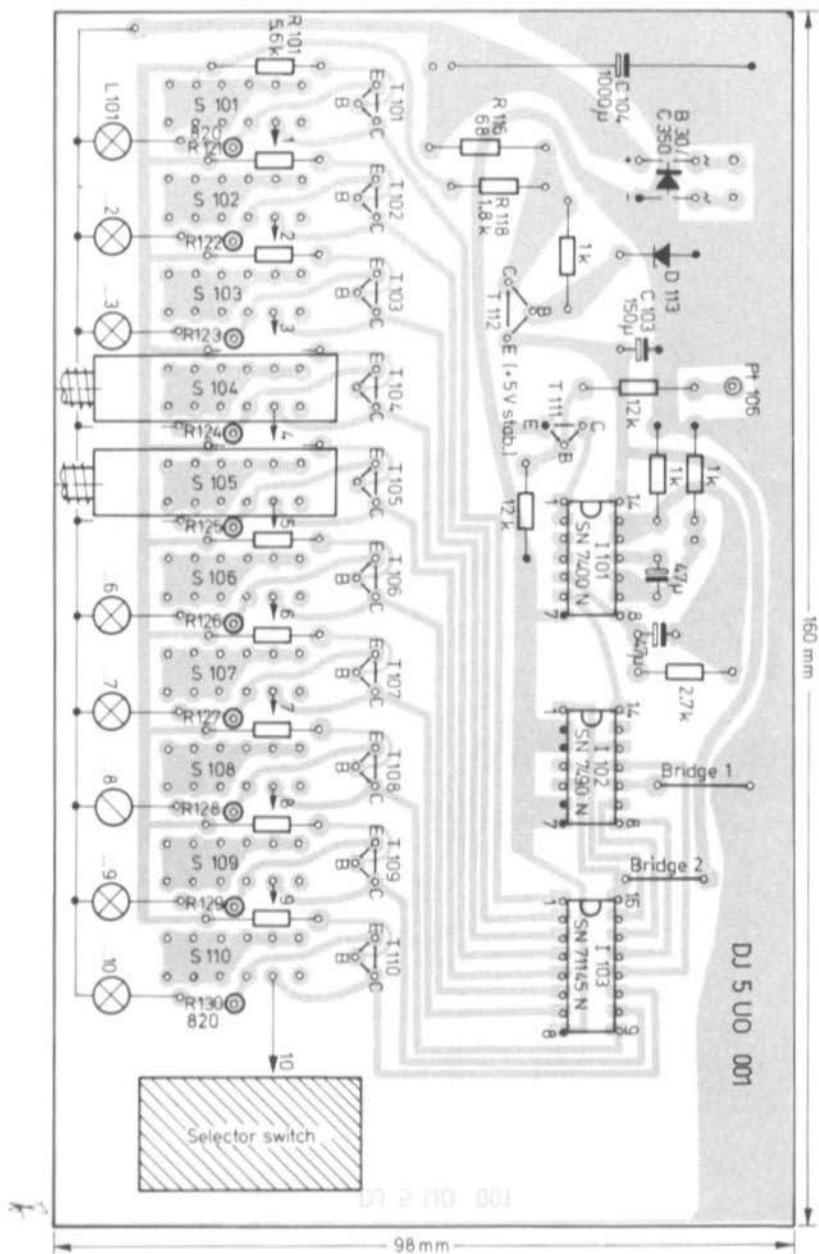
Printed circuit board DJ 5 U0 001 and component locations
